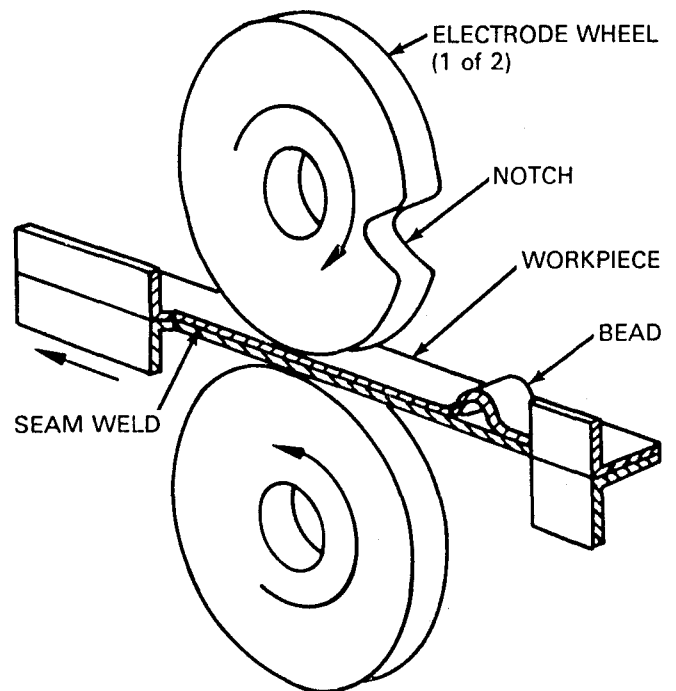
Notched Electrode Wheel for Seam Welding of a Workpiece Having Obstructions in the Path of the Wheel
